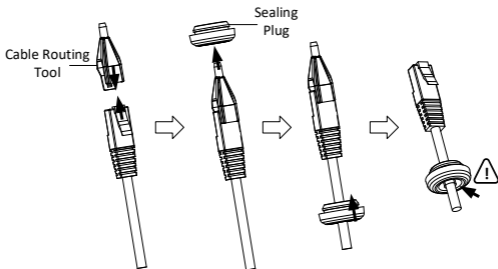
Route RJ45-terminated cable through Sealing Plug
